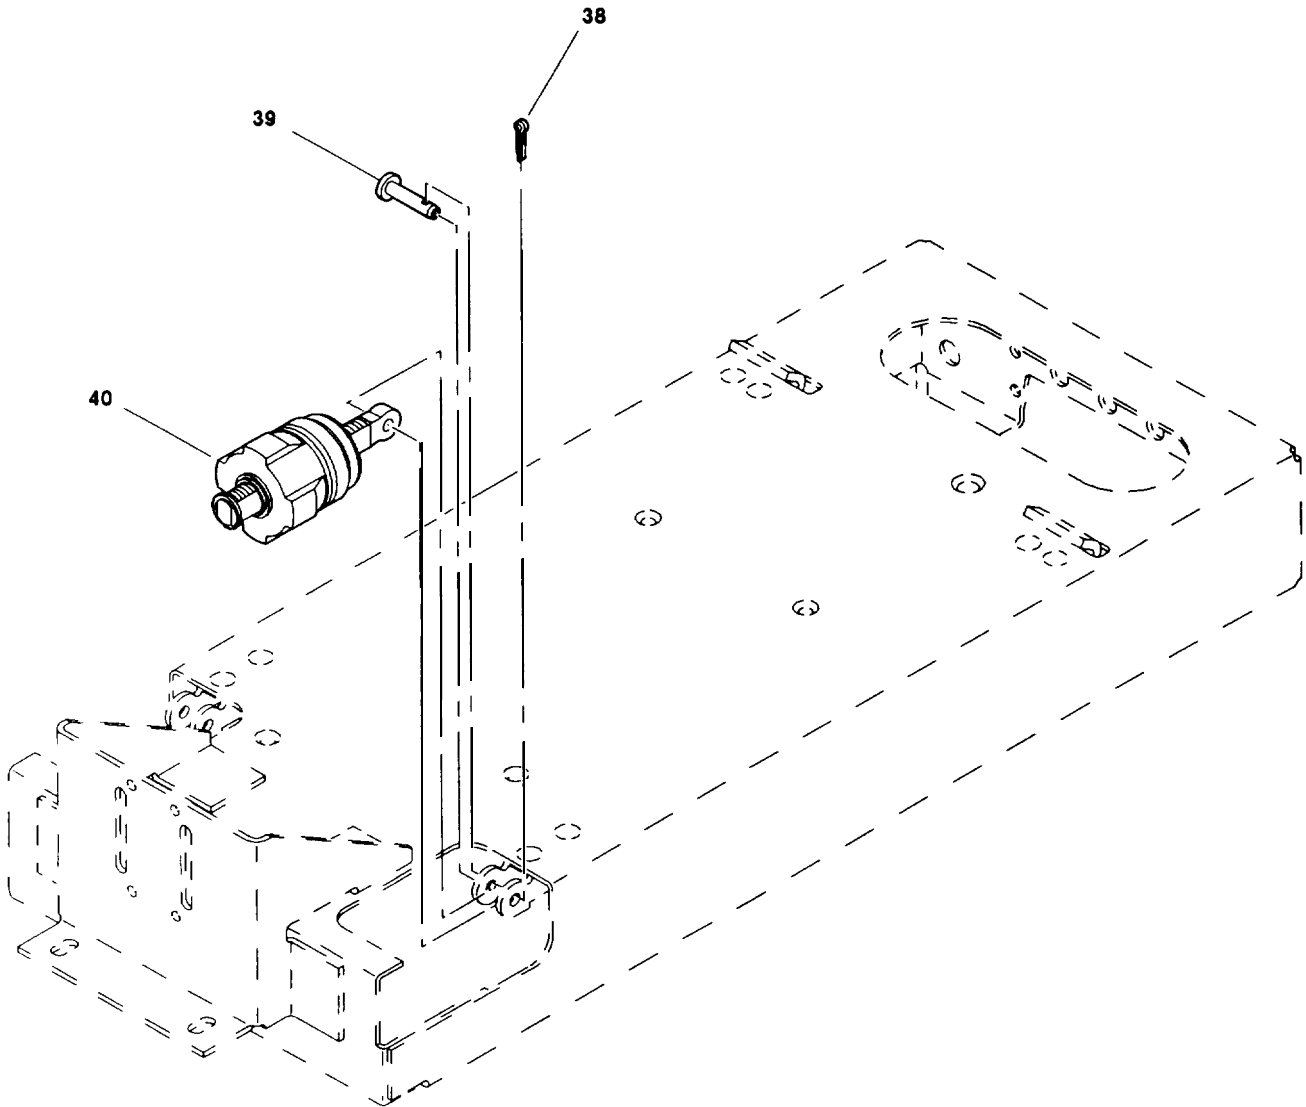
MT-6373 Mounting Base Exploded View (Sheet 3 of 3)
